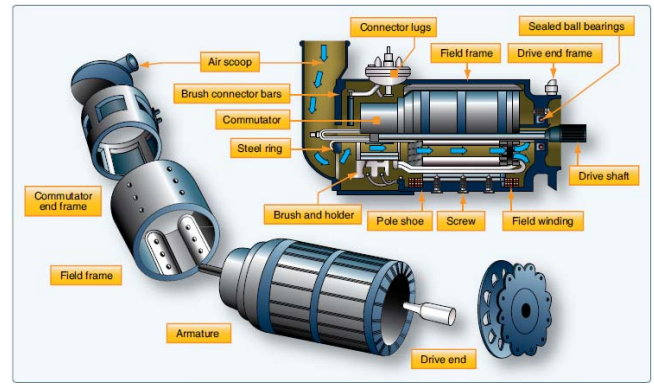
Exploded view of a typical 28-Vdc aircraft generator [23].
